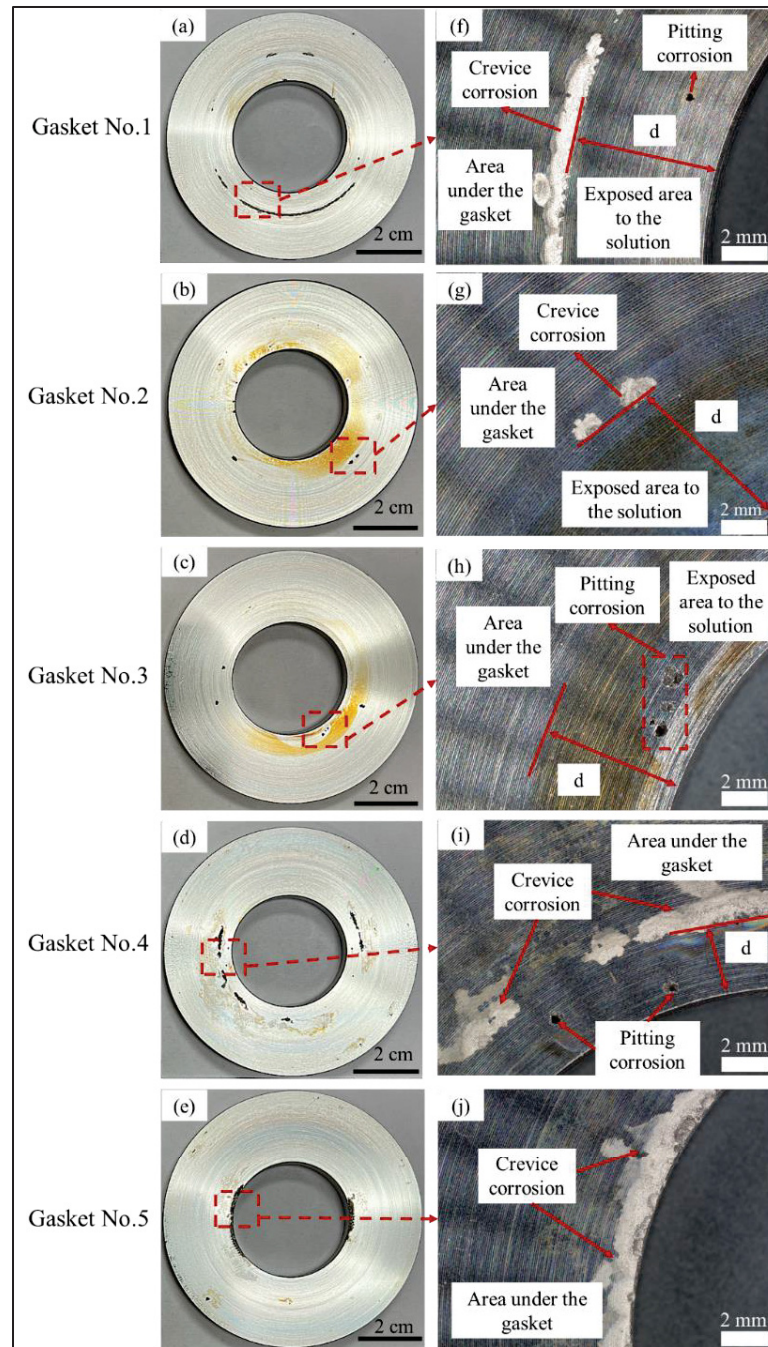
Corroded flange sample plates after CPP test: (a) Top view of the sample plate with Gasket No. 1; (b) top view of the sample plate with Gasket No. 2; (c) top view of the sample plate with Gasket No. 3; (d) top view of the sample plate with Gasket No. 4; (e) top view of the sample plate with Gasket No. 5; (f) Microscopic image of the corroded area for the sample plate Gasket No. 1; microscopic image of the corroded area for the sample plate with Gasket No. 2; microscopic image of the corroded area for the sample plate with Gasket No. 3; microscopic image of the corroded area for the sample plate Gasket No. 4; microscopic image of the corroded area for the sample plate with Gasket No. 5
